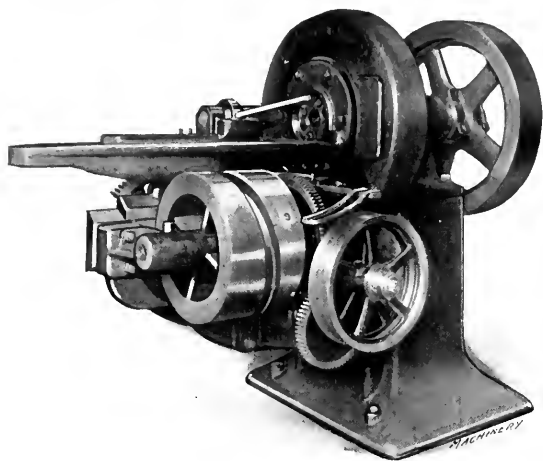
Langelier No. 4 Swaging Machine with Semi-automatic Holder
